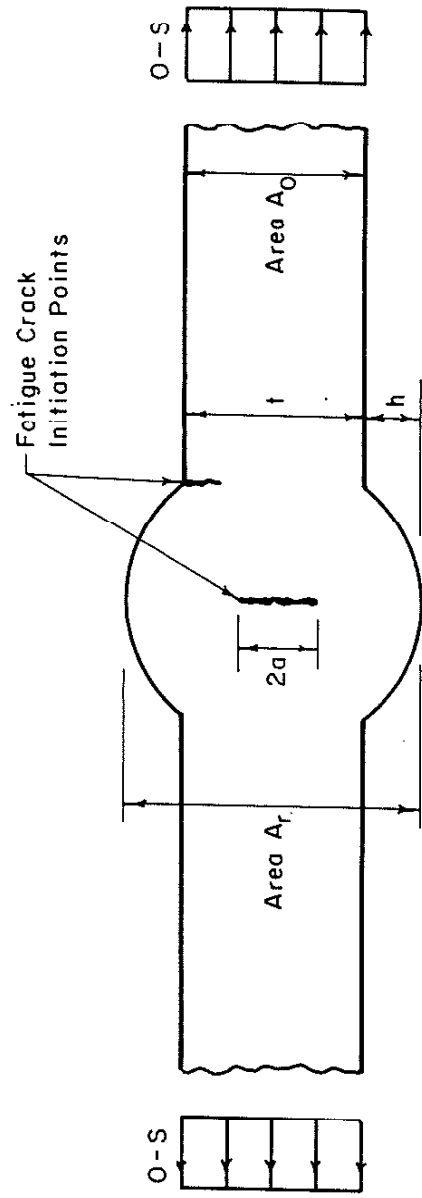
Geometry Considered in the Investigation of N_p from Internal Weld Defects
